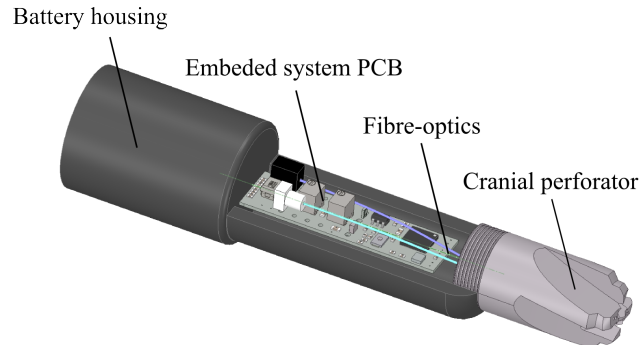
Envisioned wireless CP attachment. The PCB and optical element are designed to fit inside a narrow cylindrical enclosure and rotate together with cranial perforator.
